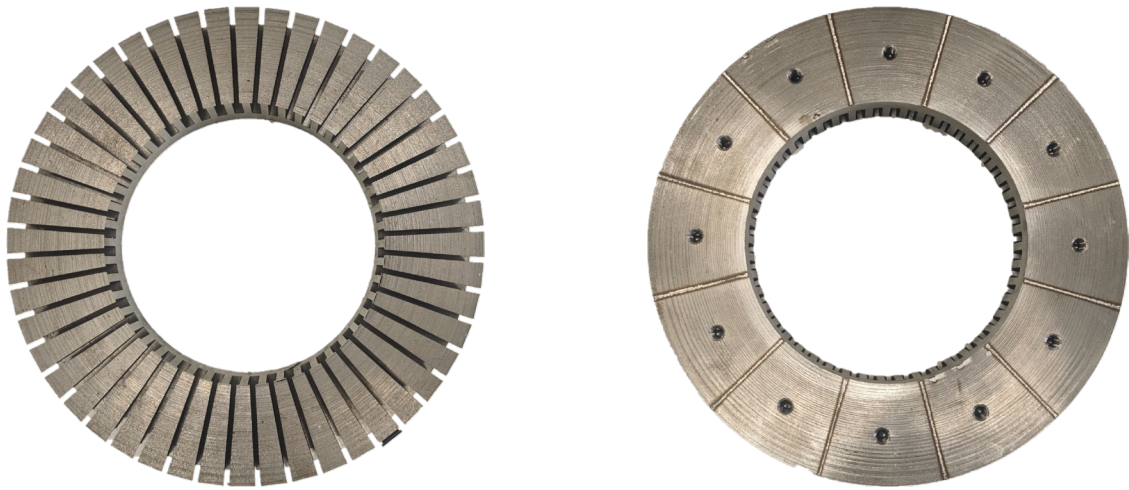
Unwound laminated stator, front and back views. The rear view shows radial laser welds and mounting holes.
